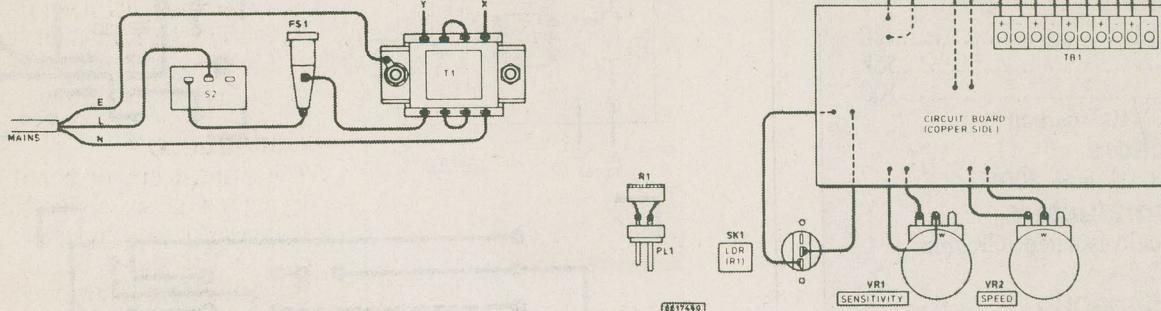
Interwiring details from the main PCB. The LDR (R1) is mounted directly on PL1 during testing only. It should be wired remotely from the unit.
